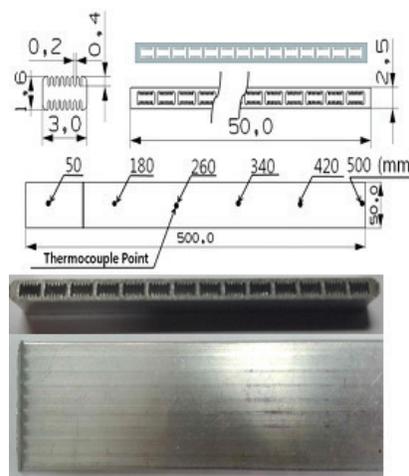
Drawing of the specimen and photo of the finished product (Unit: mm).
